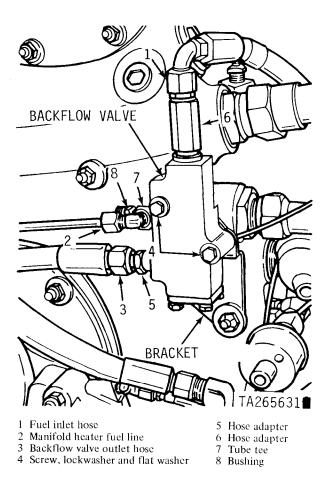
Removing or installing fuel backflow valve, model AVDS-1 790-2D engine.
